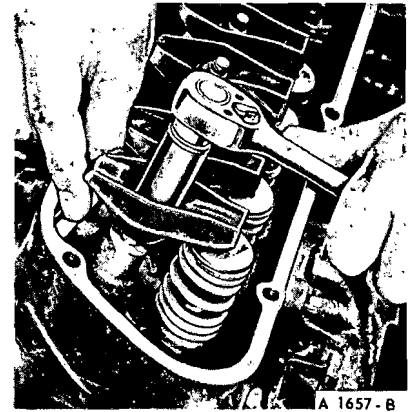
Typical Valve Clearance Adjustment—289 V-8
